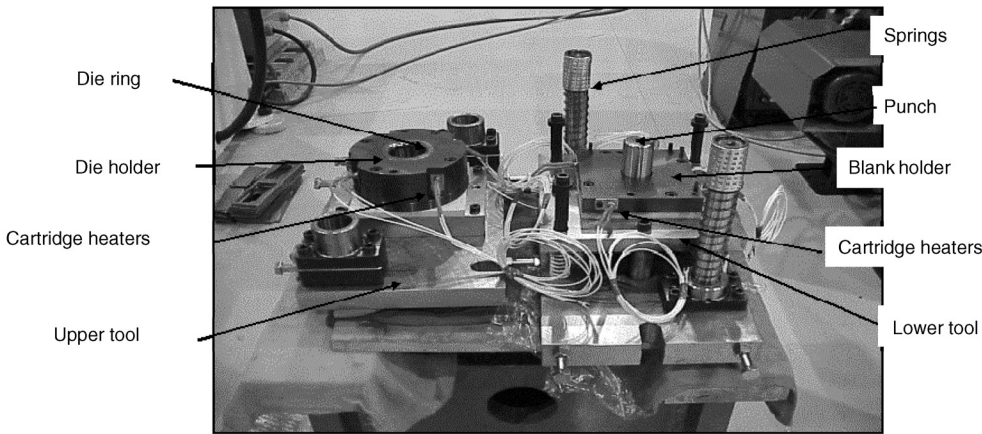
Open warm forming tooling (top die set on the left, bottom die set on the right). Courtesy of Aida-America Corporation
